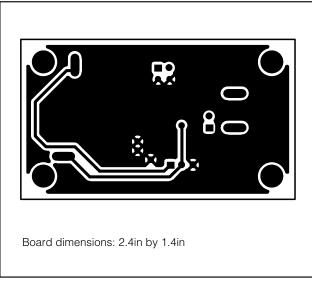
MAX889S EV Kit PC Board Layout—Solder Side
